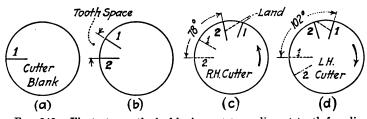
Illustrates method of laying out two adjacent tooth face lines and indexing these lines to their proper position. (These views are from foot-stock end with index head on left end of table, as in B. & S. machine). Remember when indexing for a certain number of degrees that one turn of the index handle moves the work nine degrees.
